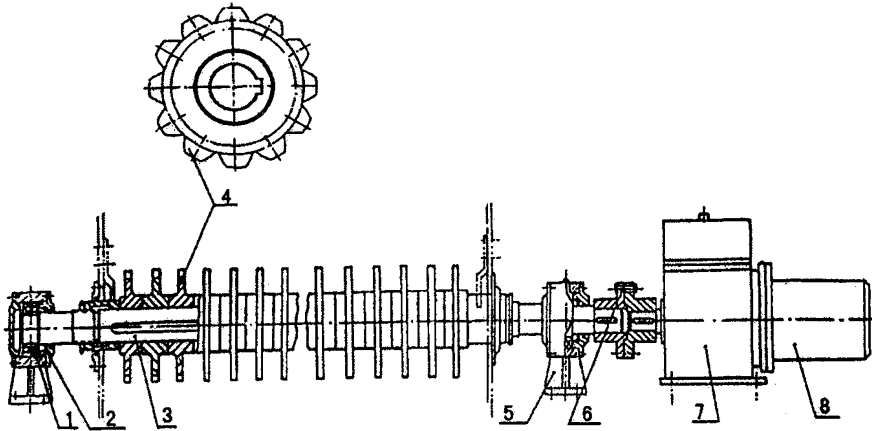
HGS - 1410 etc. thick roller screen 1. rolling bearing; 2. bearing seal; 3. sieve axis; 4. sieve tray (sheet); 5. bearing seat; 6. coupling; 7. gear box; 8. electromotor
